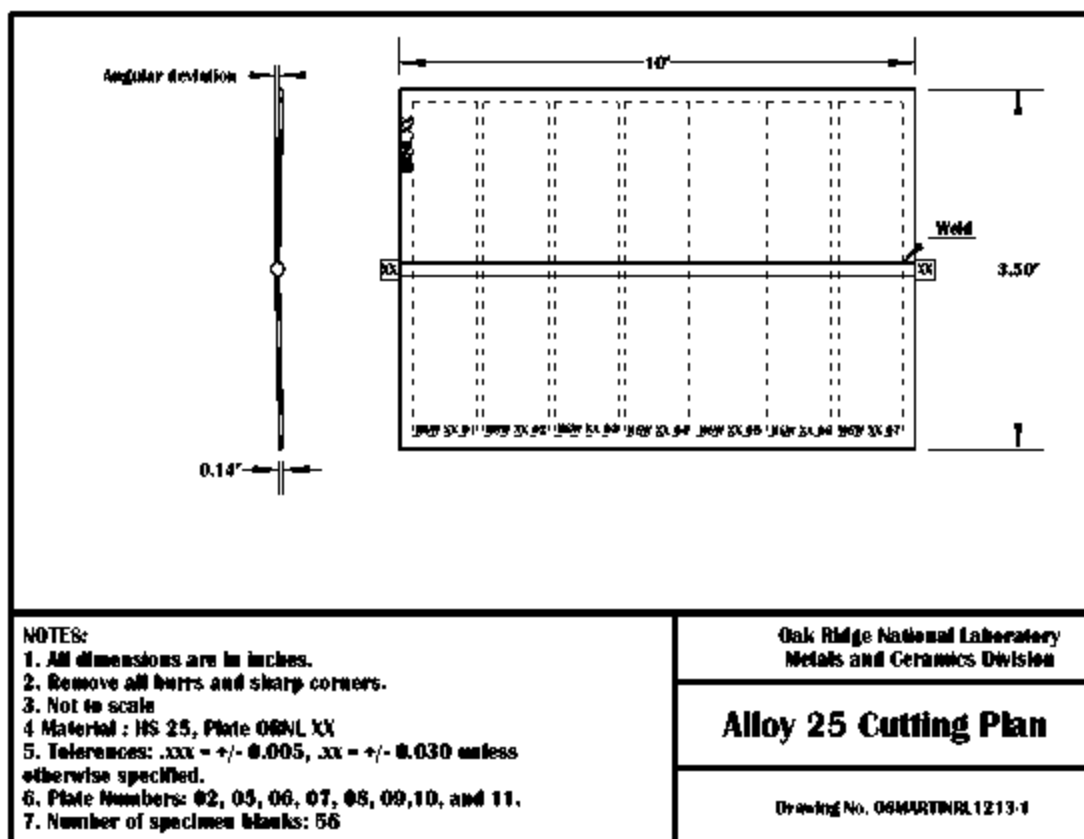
Example cutting plan for alloy 25 weldment specimens.
